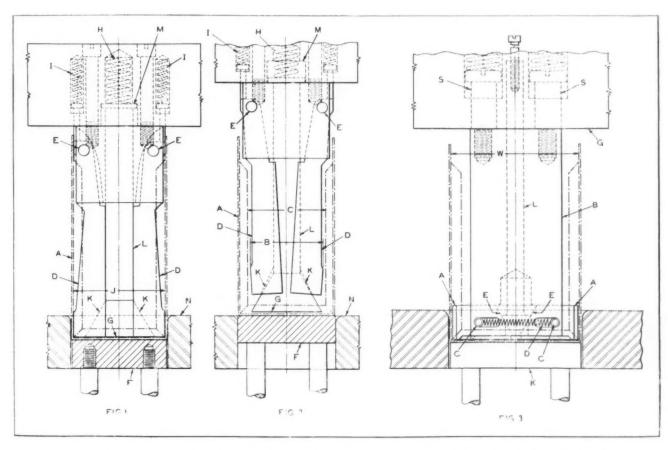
Die with Expansion Punch for Forming Deep U-shaped Frame A from 0.0375 Inch Thick Cold-rolled Steel Channel, Shown at End of Down Stroke. Fig. 2. Die with Punch Collapsed to Permit Removal of Formed Frame A. Fig. 3. Die of Simple Design for a Forming Operation Similar to that Performed by Die Shown in Figs. 1 and 2
